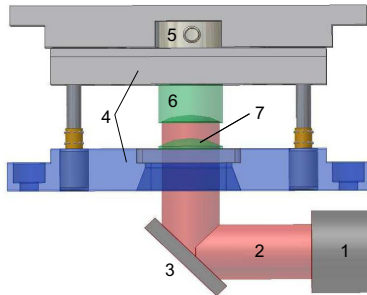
Principle set up of laser supported hot embossing. 1 laser optics, 2 laser beam, 3 mirror, 4 forming tool, 5 pressure sensor, 6 tool insert, 7 workpiece.
